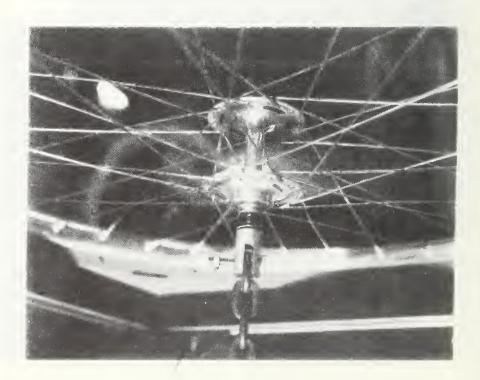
Rim Test Fixture - Close-up of Axle Coupling
